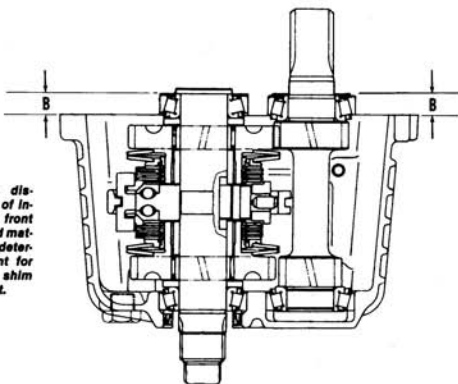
Measure distance (B) between top of input and output shaft front bearing outer races and mating surface of case to determine "B" measurement for establishing correct shim thickness. See text.
